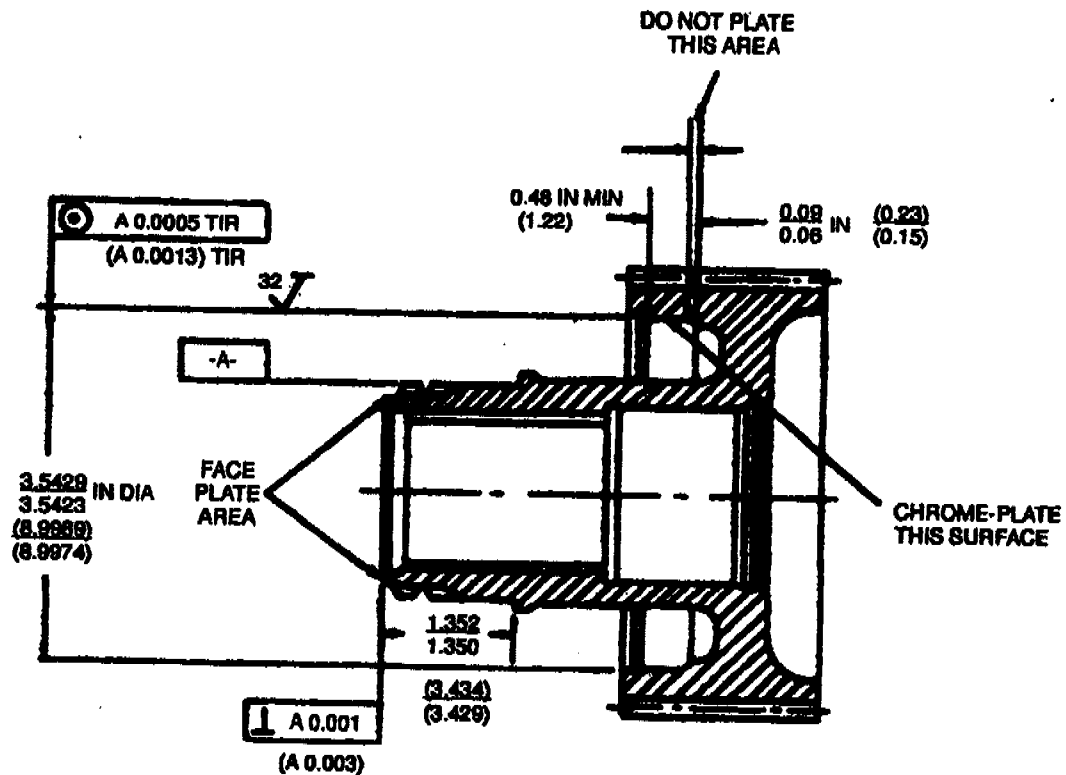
Plating Area - Output Helical Gearshaft (T53-L-13B, -703).
